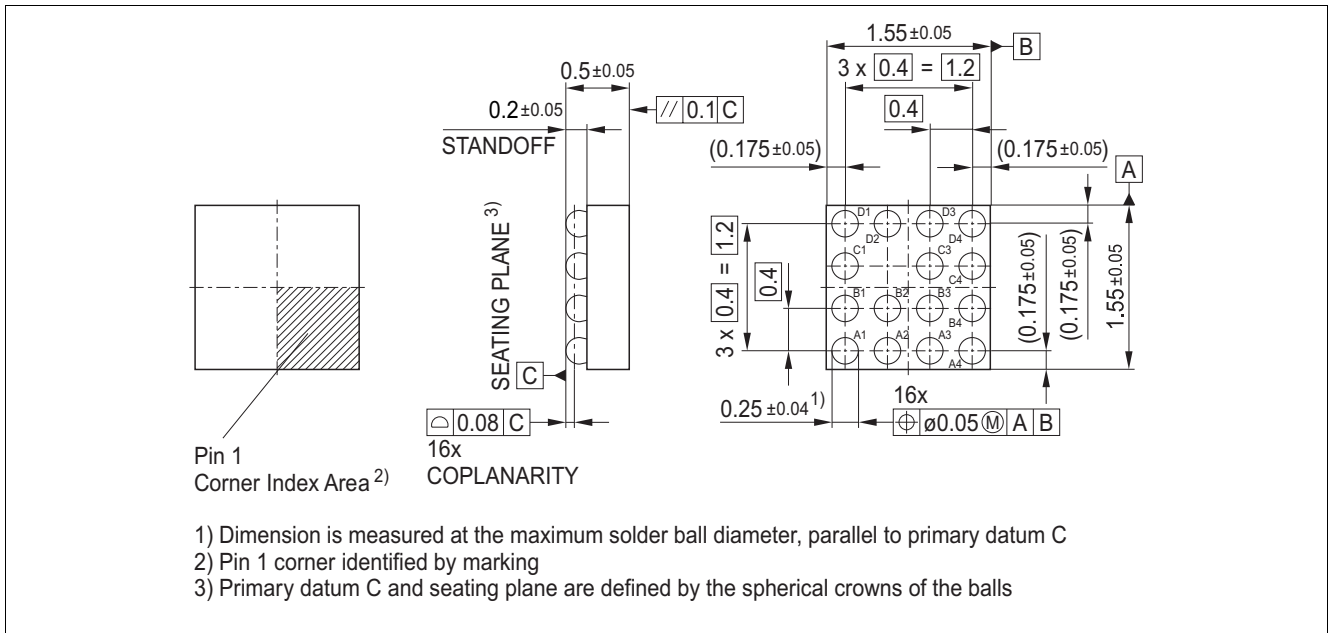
Package outline for WLP-15-1 (dimension in mm)
